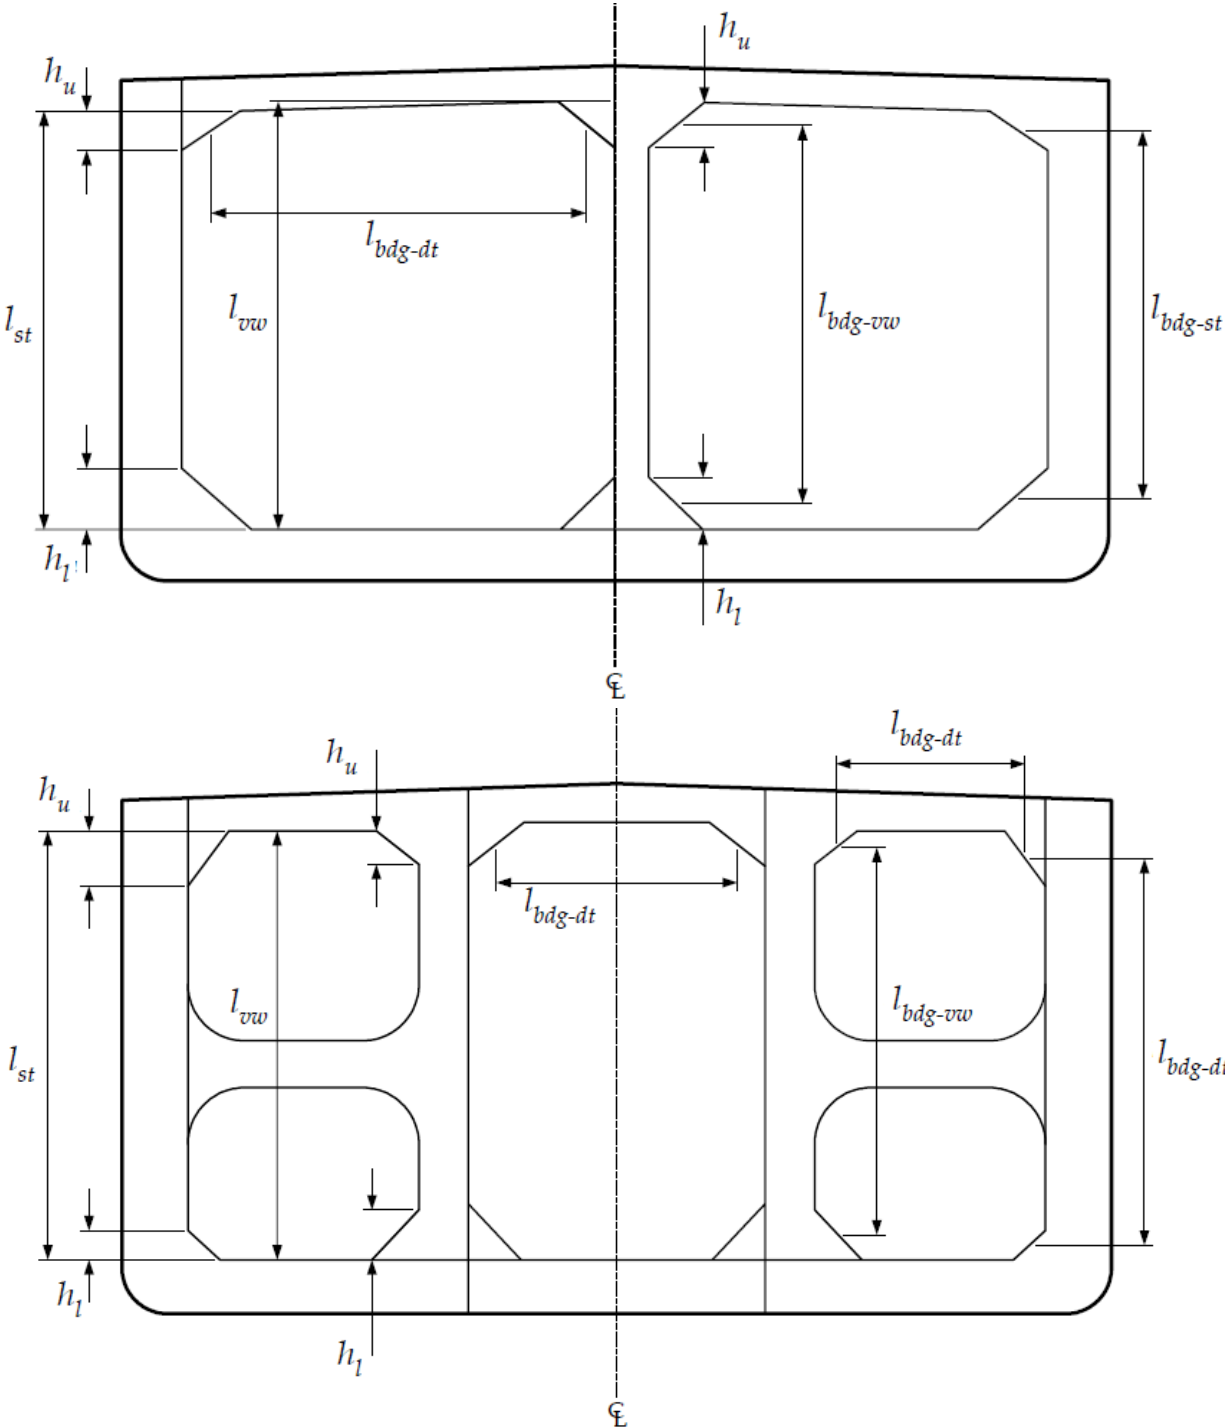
Definition of spans of deck, side transverse, vertical webframes on longitudinal bulkheads and horizontal stringers on transverse bulkheads (... continued on next page)
